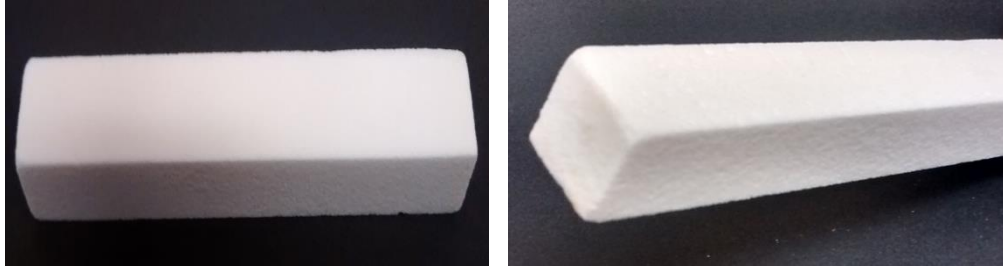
Sharpening (dressing) stick refreshing the core drill bit cutting surface after each test exposing a fresh layer of abrasive particles.
